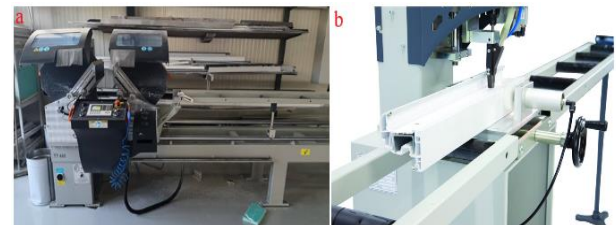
Murat TT 405 machine – a and Murat DV 404 machine - b
